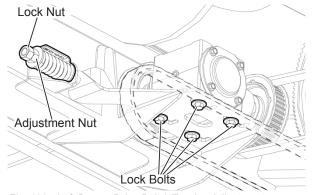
Left Draper Drive Belt 2 Tension Adjustment
